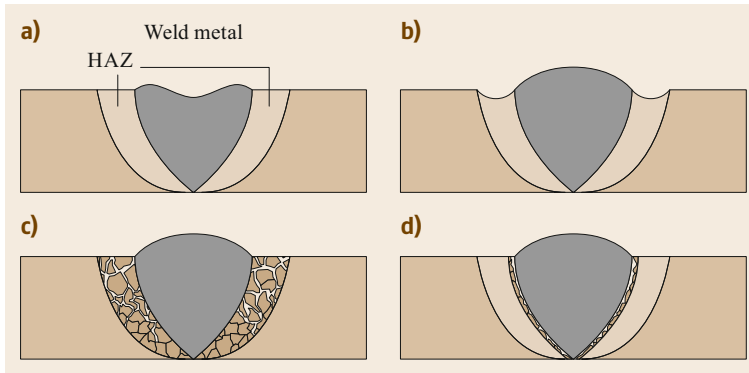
d Types of selective corrosion in welded joints [6.5]. (a) Selective corrosion of weld metal, (b) selective corrosion of HAZ, (c) intergranular corrosion, (d) knife-line corrosion
